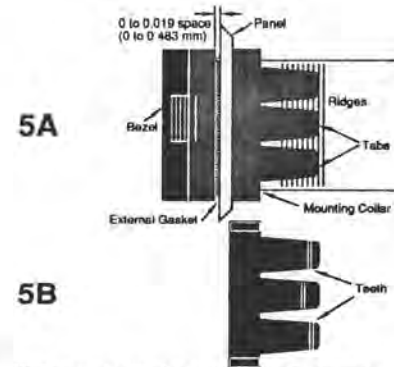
Mounting, Case Side View & Collar Cross Section.
